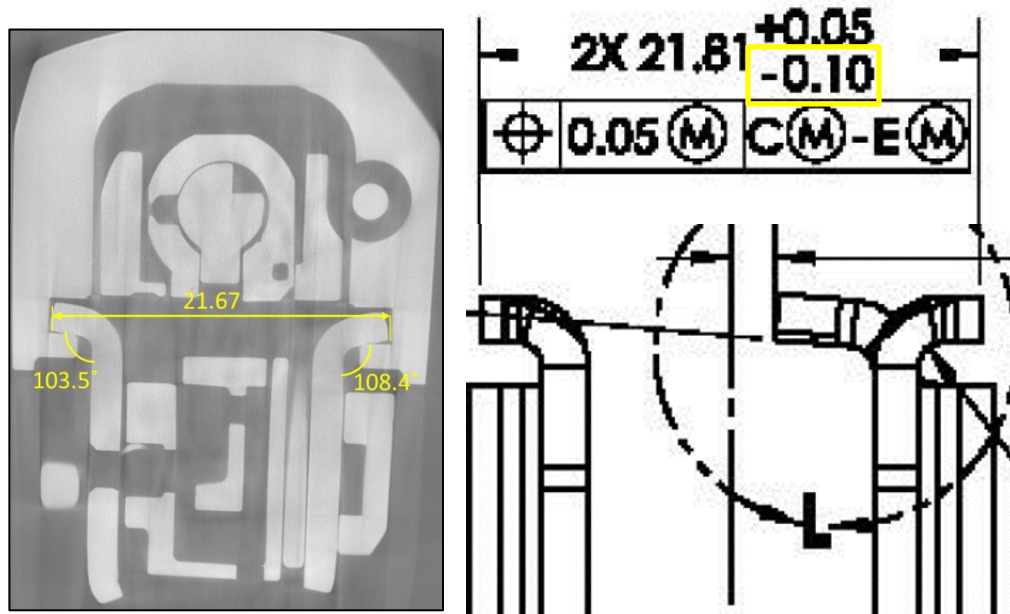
Receiver stamping measurements from CT scan (left), Sig receiver drawing #1301552
